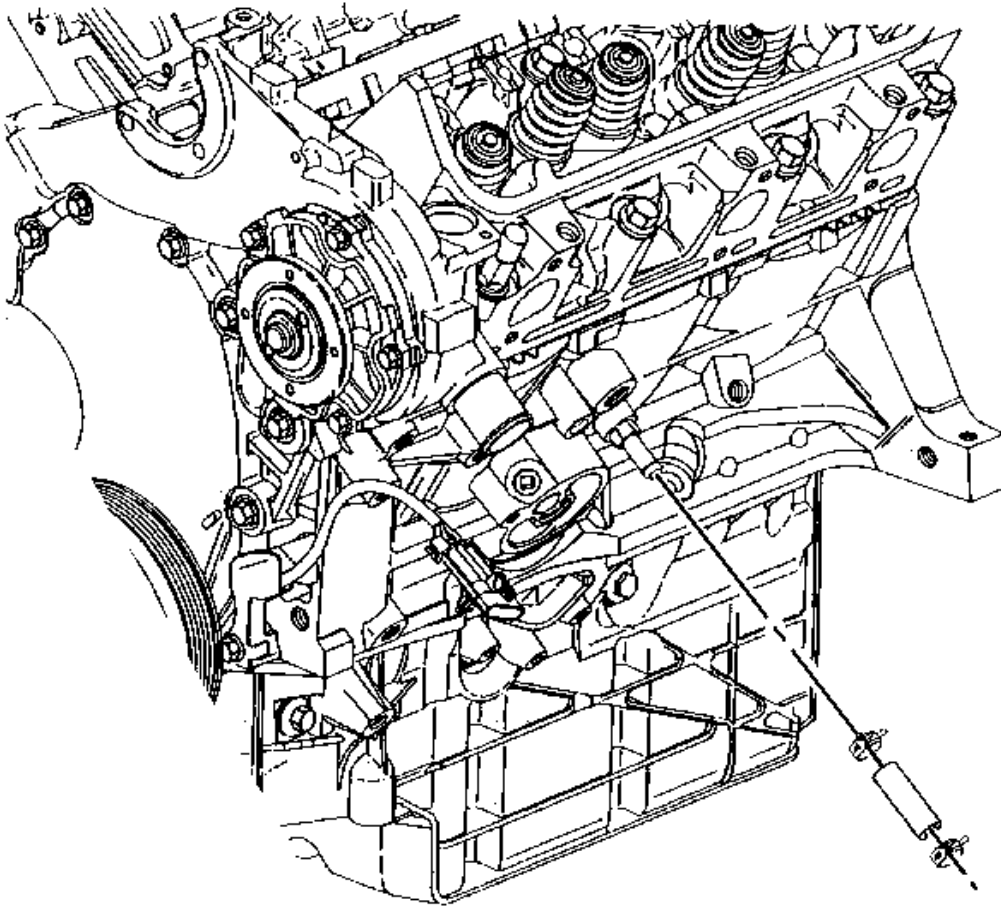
View Of Oil Cooler Inlet Hose Clamp & Oil Cooler Inlet Hose
